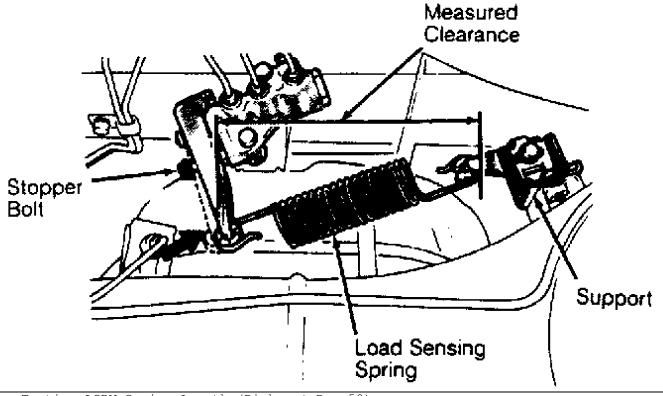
Testing LSPV Spring Length (Pickup & Ram-50) Courtesy of Mitsubishi Motor Sales of America.
